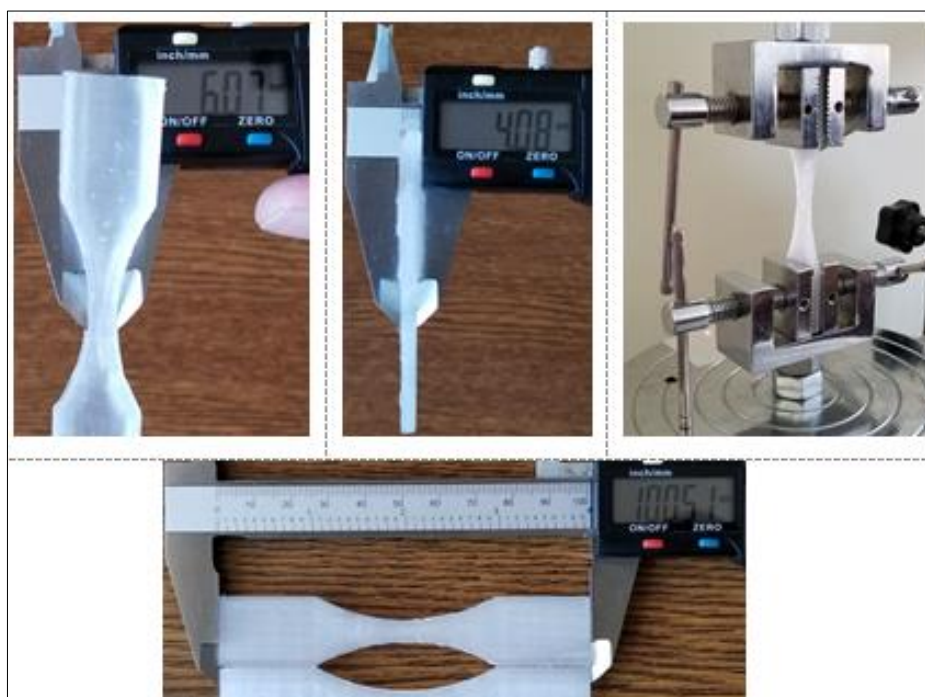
Dimensions of the specimens for tensile testing and their fixing in the universal jaws
